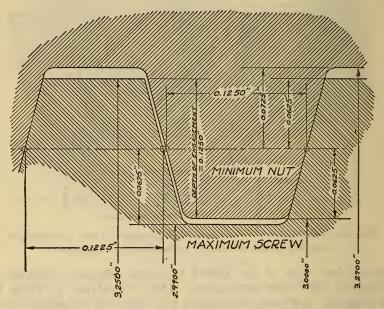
Illustration of tightest condition for class 1 Acme, 4 threads per inch, 3½ inches diameter
